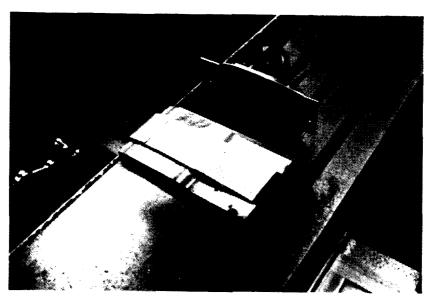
Machining Honeycomb Before Expansion (HOBE).
